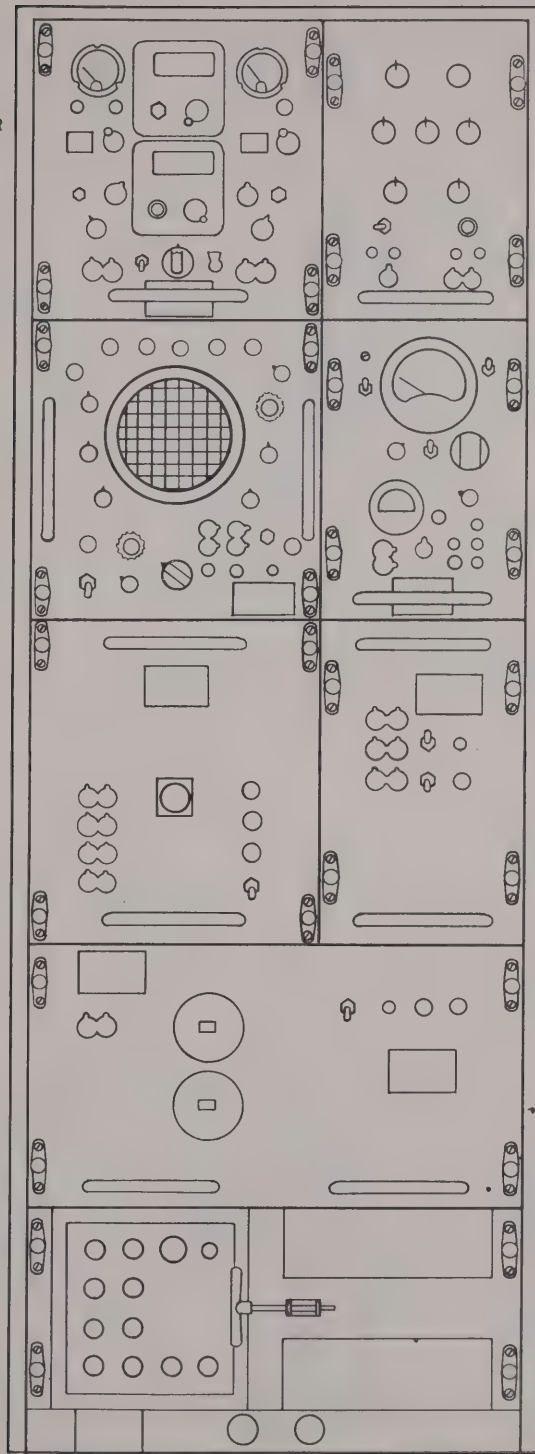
Power Supply Assembly OA-1536/GRN-9, with Test Equipment, Front Panel View
